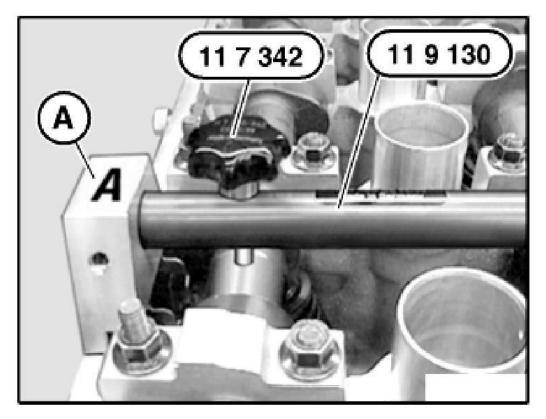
Attaching Setting Gauge To Cylinder Head Courtesy of BMW OF NORTH AMERICA, INC.
